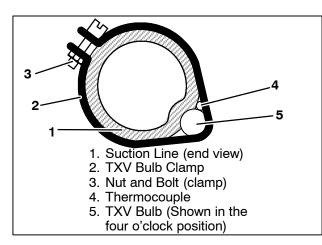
Thermostatic Expansion Valve Bulb and Thermocouple Installation
